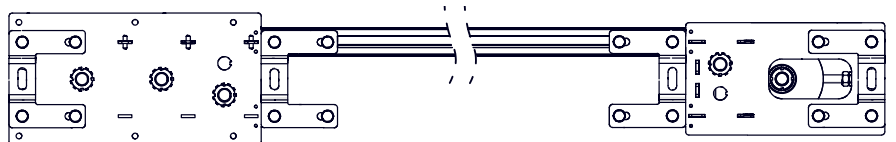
Installation variants – Single-track system with motor mounted on the right and deflection unit mounted on the left
